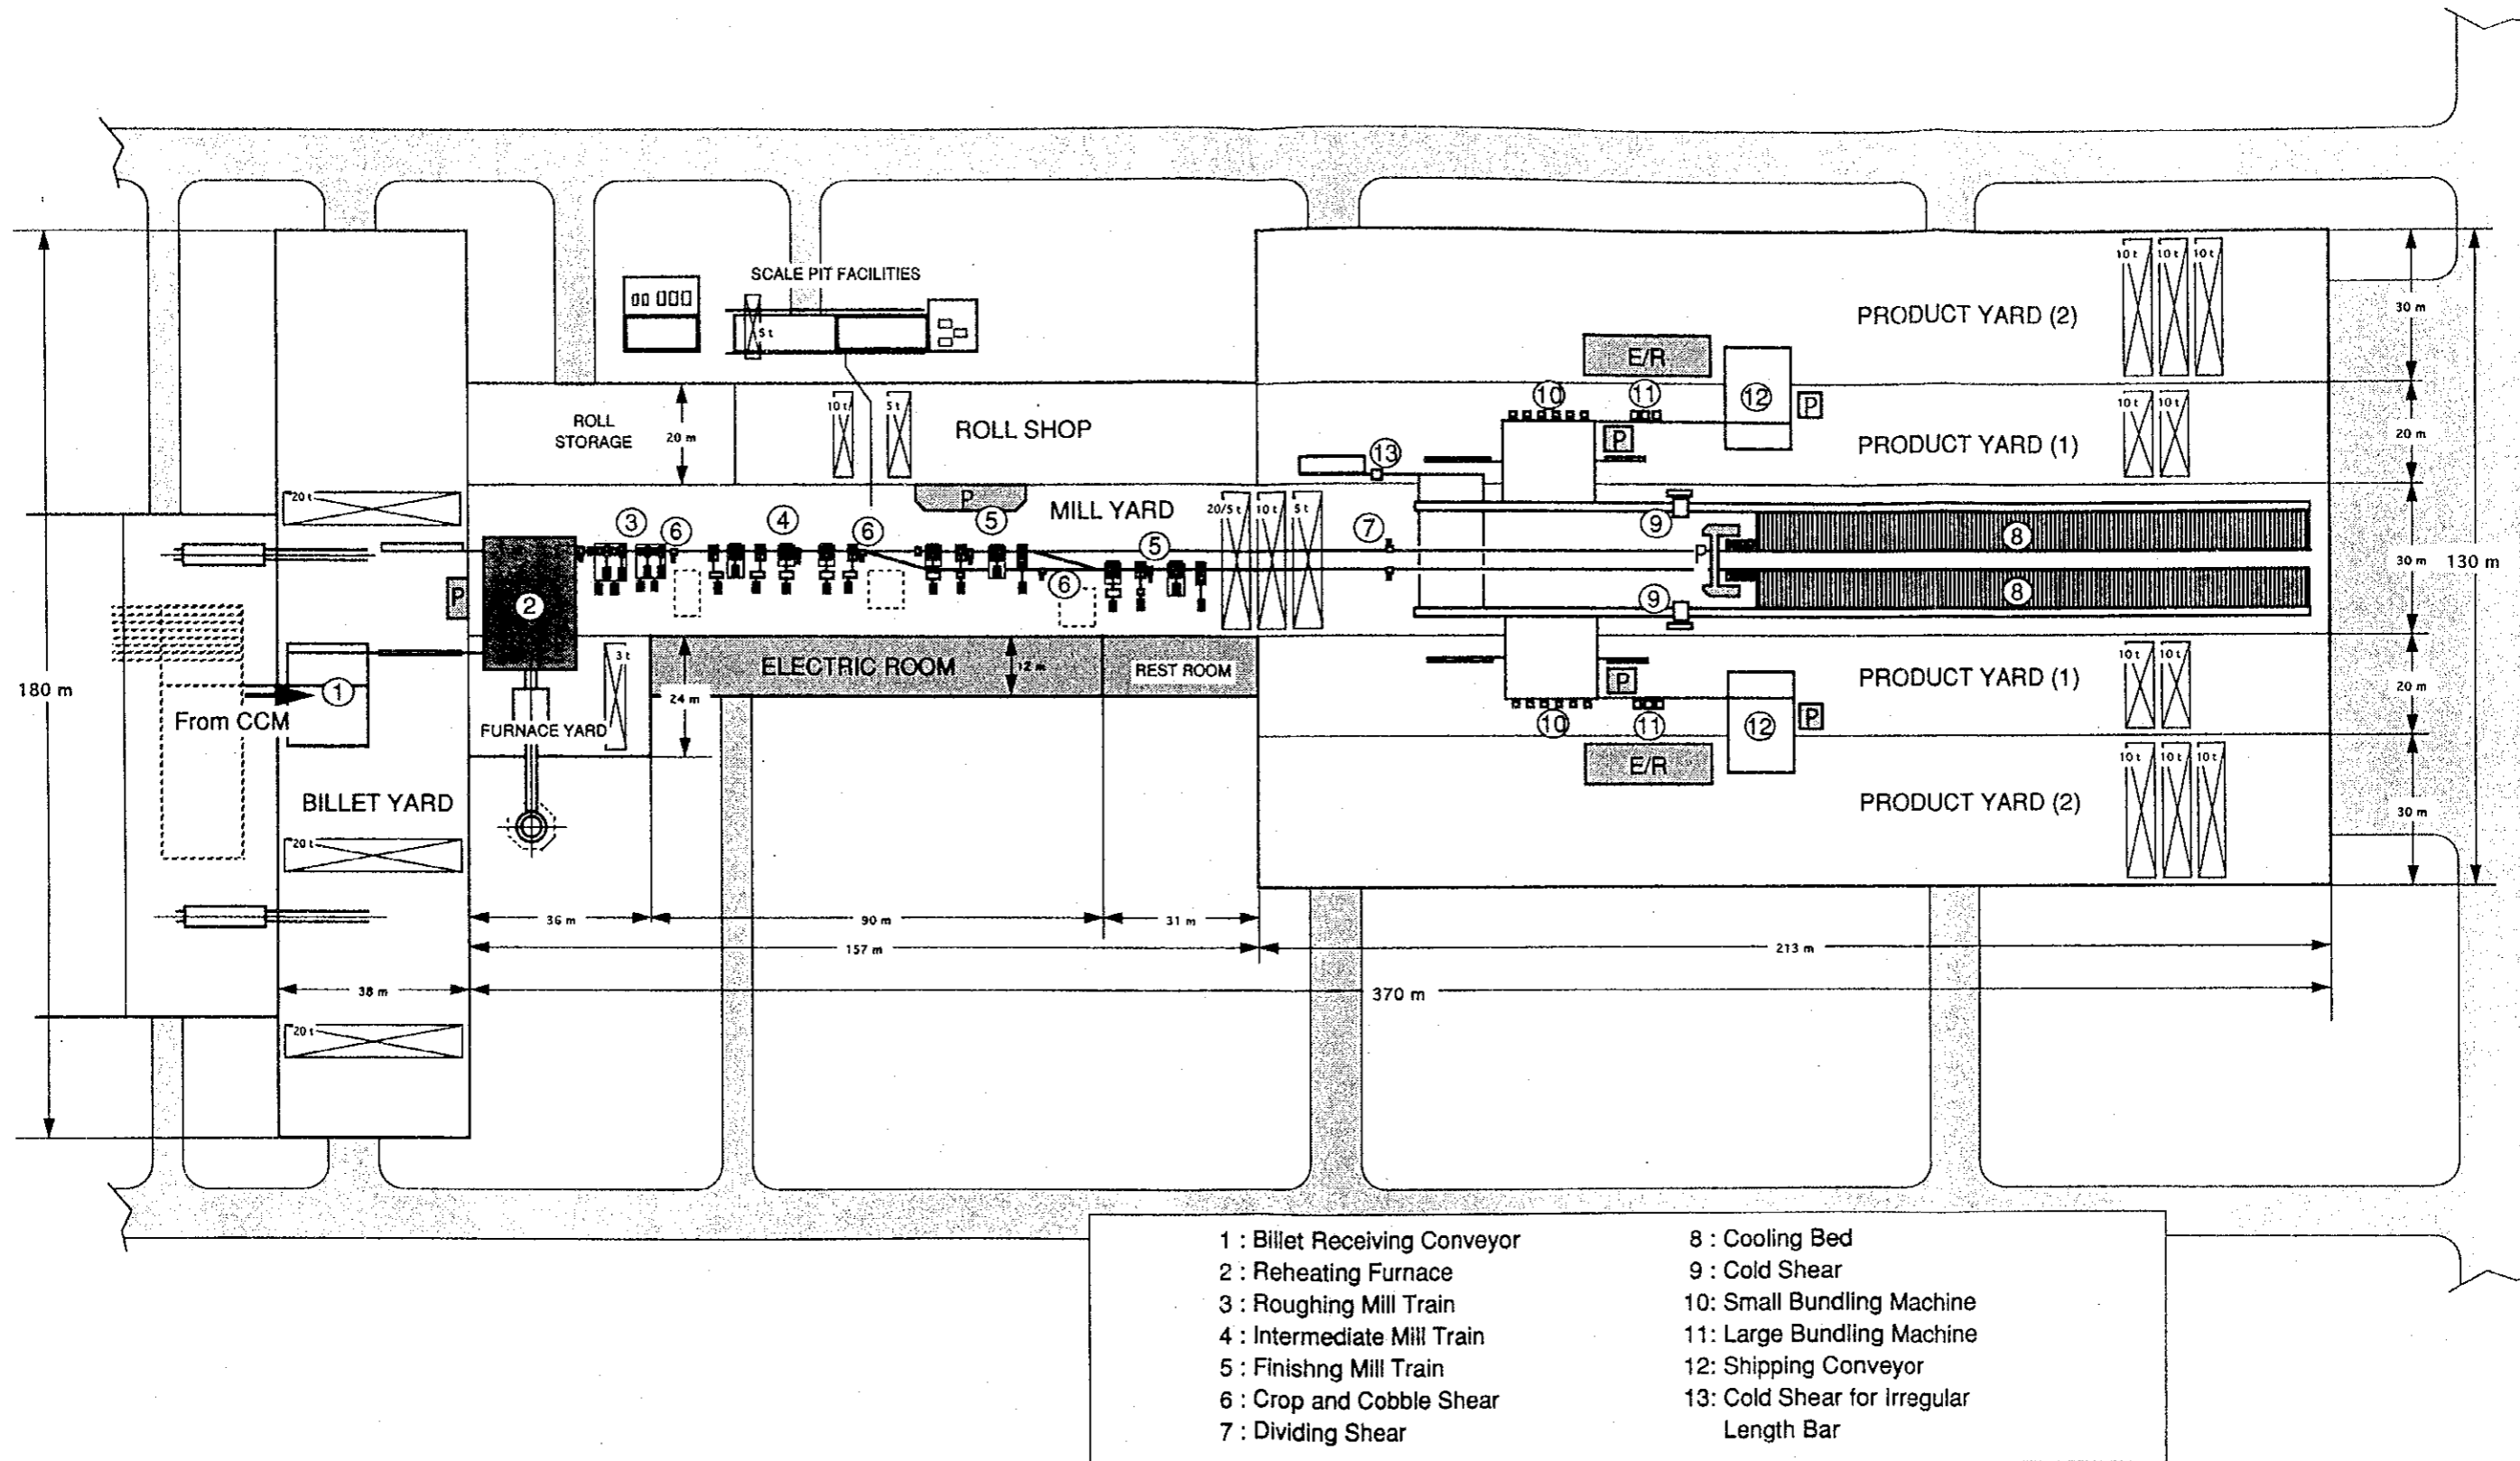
General Layout of Bar Rolling Mill Plant
